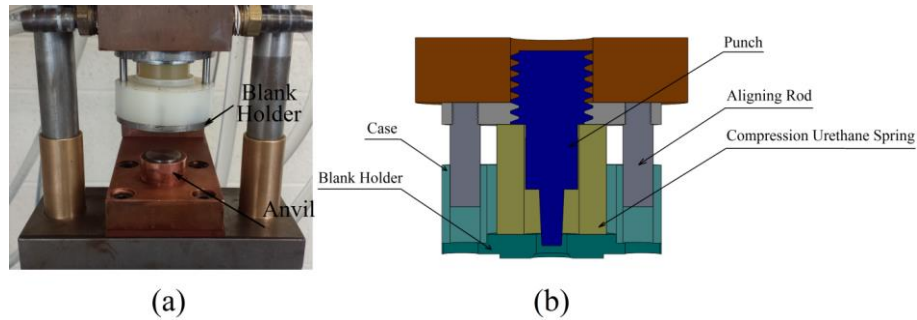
Die-less clinching tool set-up; (a) photograph for the installation of the tooling and (b) schematic drawing showing the punch, blank holder shape and compression urethane spring.
